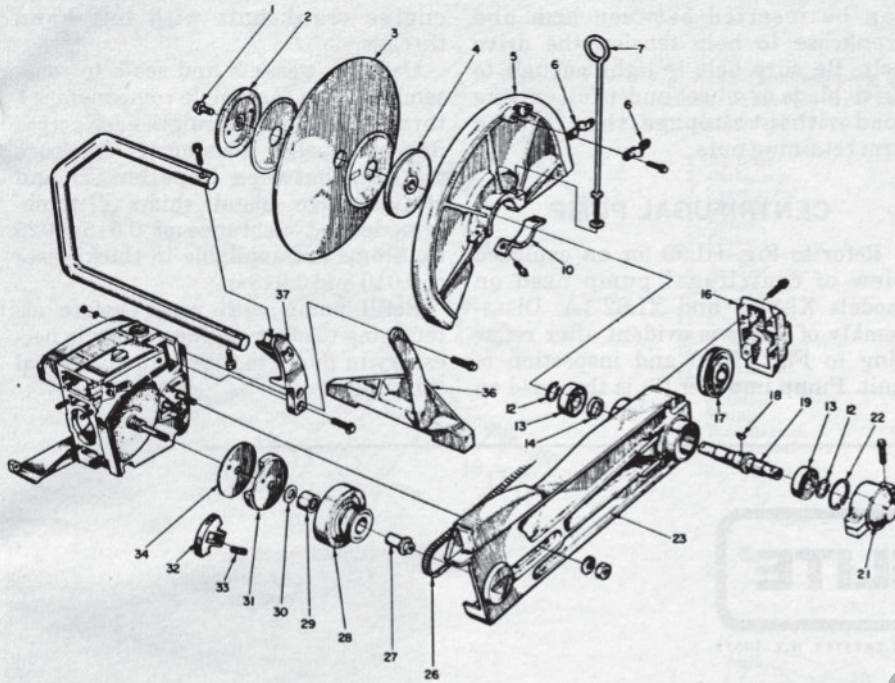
Exploded view of drive arm and cutting wheel assembly used on model XL-88. Cutting wheel or saw blade can be mounted on either side of arm. Shaft guard (21) is used to cover opposite end of shaft. Belt can be renewed after removing arm from engine and the cap (16) from end of arm.
